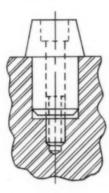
Last resort method because hex socket of cap screw must be cleaned out in order to remove core. Used when core is forgotten in original design or where there is absolutely no space available.
